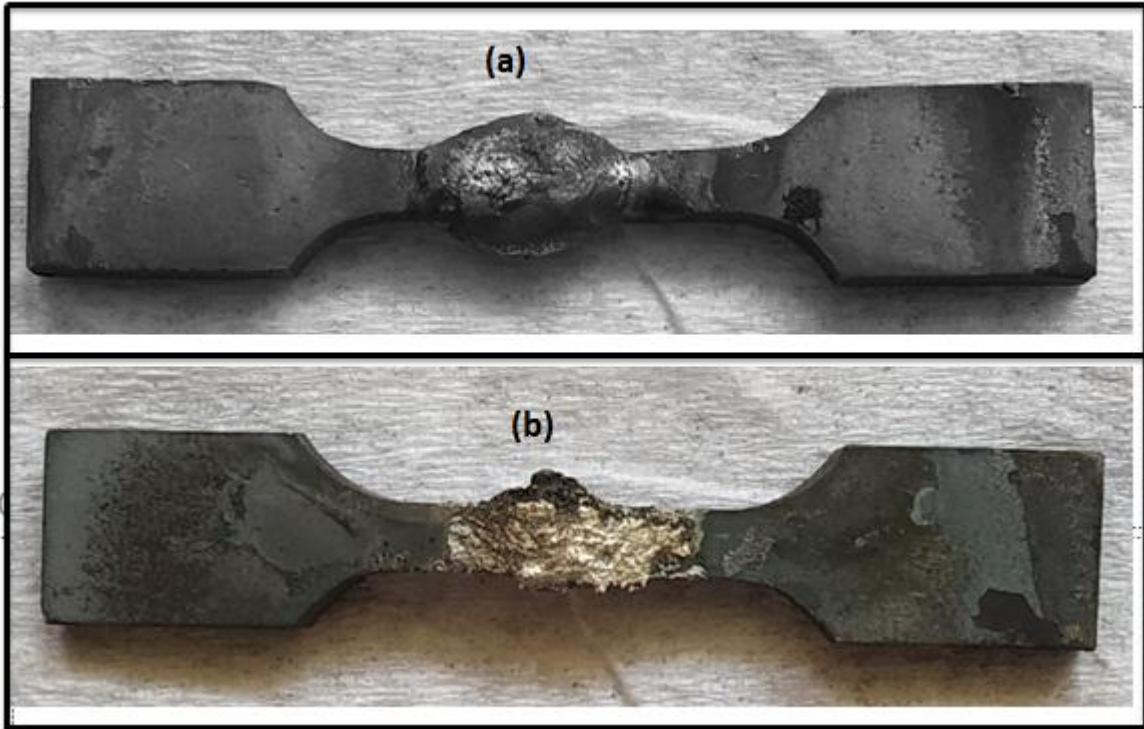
Tensile samples of (a) TIG welding (b) Microwave energy
